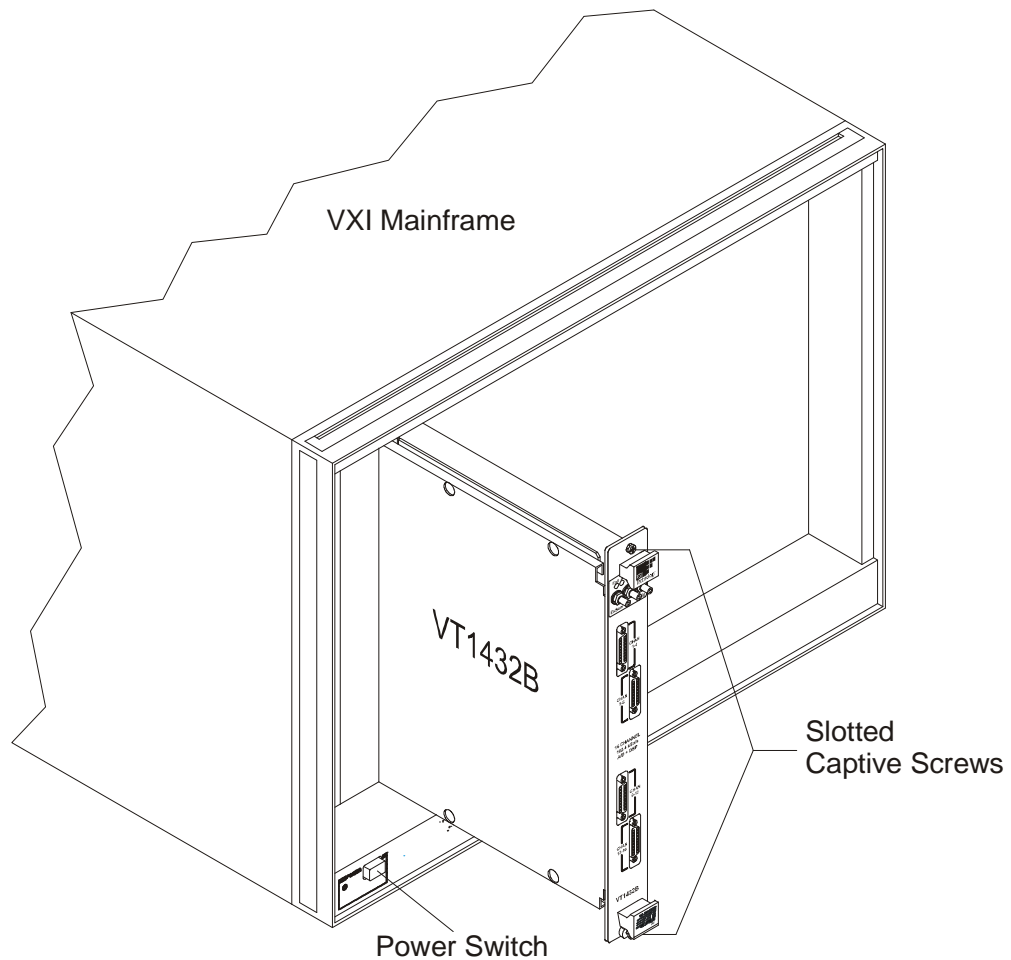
VT1432B CHASSIS INSTALLATION
